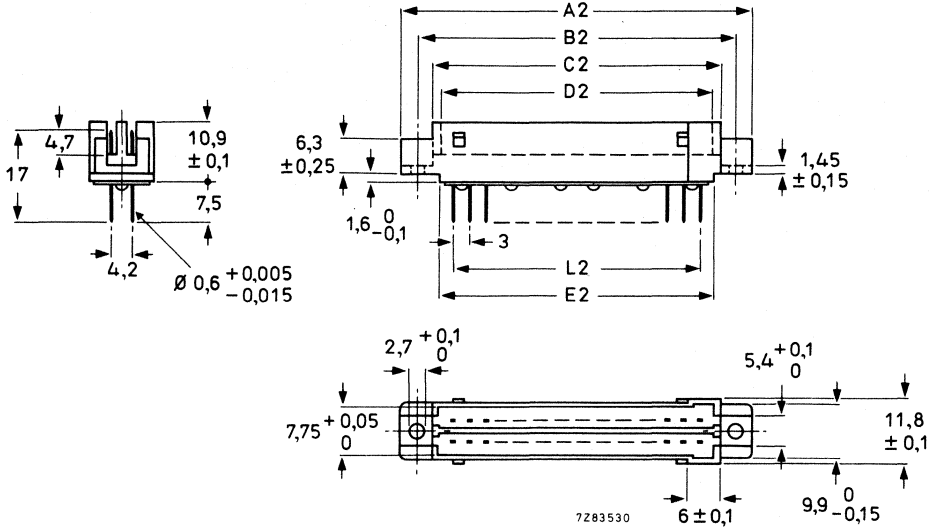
Male part with straight dip-solder pins; see Table 2 for dimensions A2, B2, C2, D2, E2 and L2.
